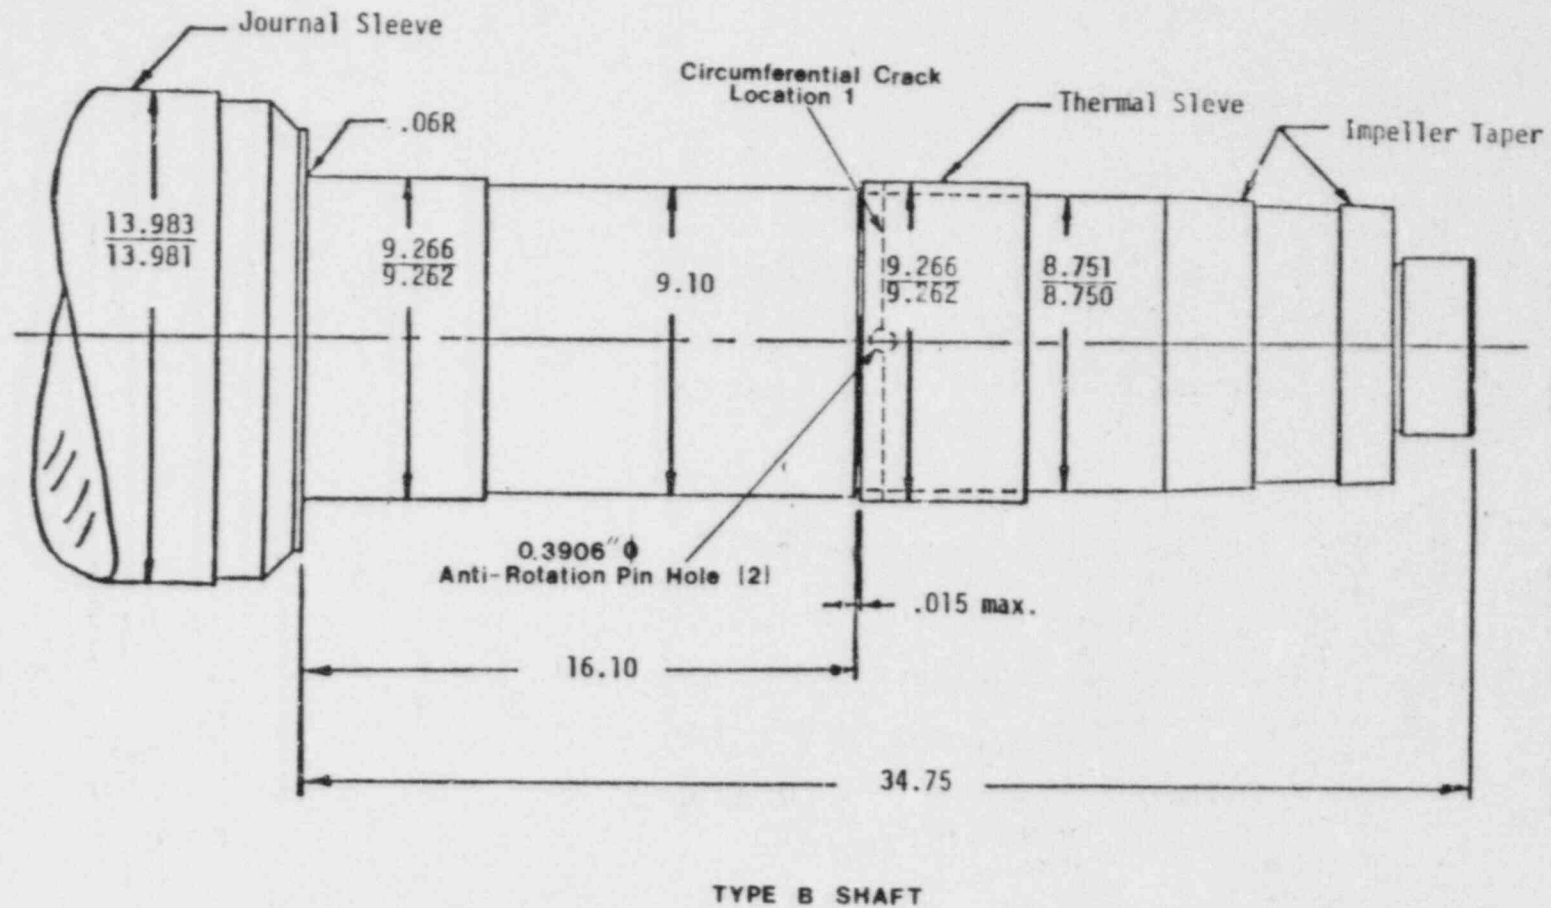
Geometry of Type B Shaft in Failure Area
